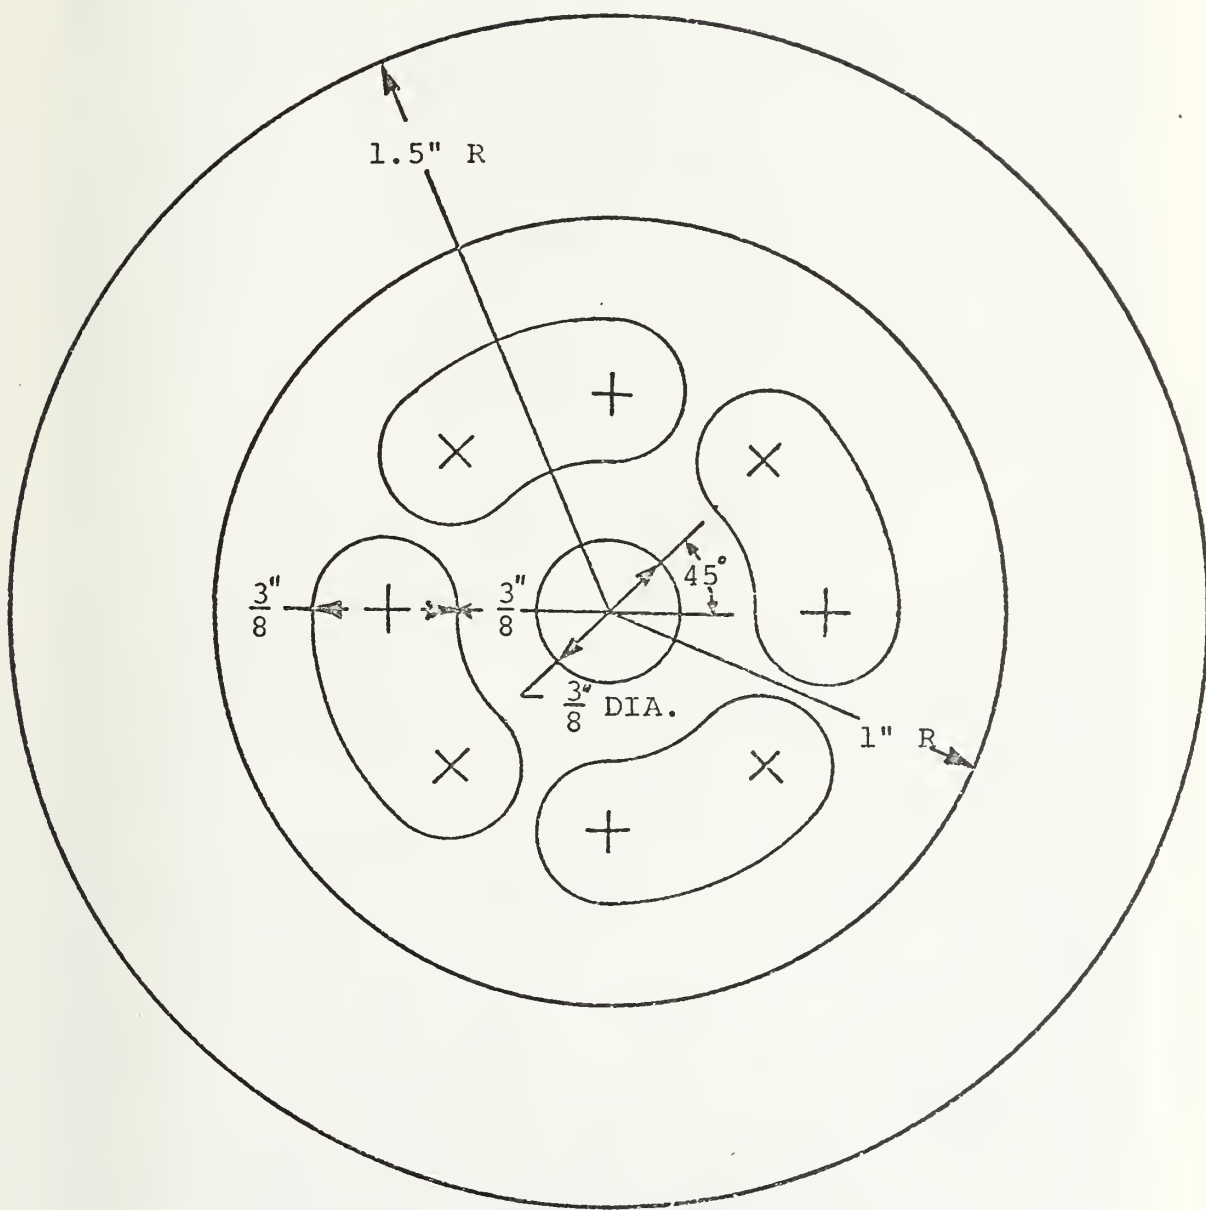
DIMENSIONS OF NOZZLE RING (END VIEW)
